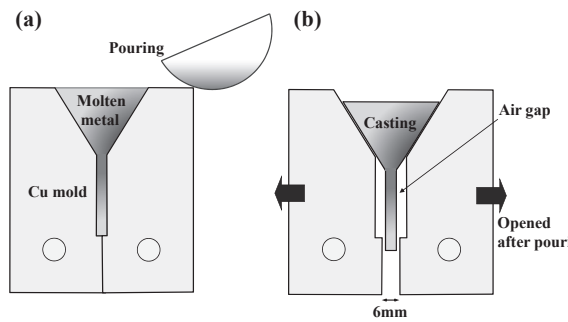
Schematic drawing of method for manufacturing casting having air gap. A) State during pouring, b) One second after end of pouring, mold was opened and solidified in the air gap space.
